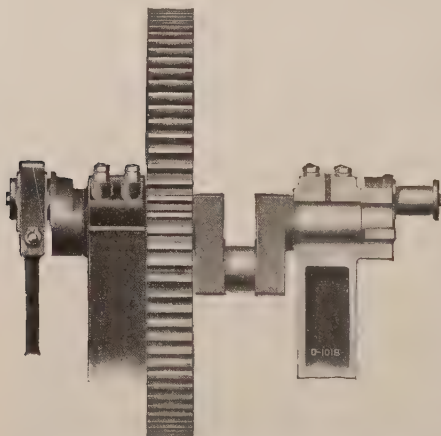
Showing arrangement of gear, crank-shaft and frame uprights in Worthington Triplex Pump.
